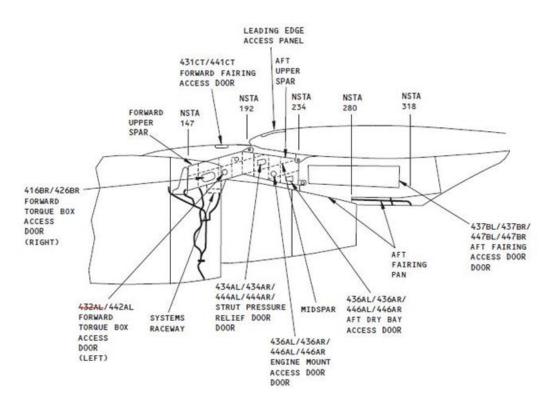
Boeing 767 Strut Drain System and Access Doors/Panels
